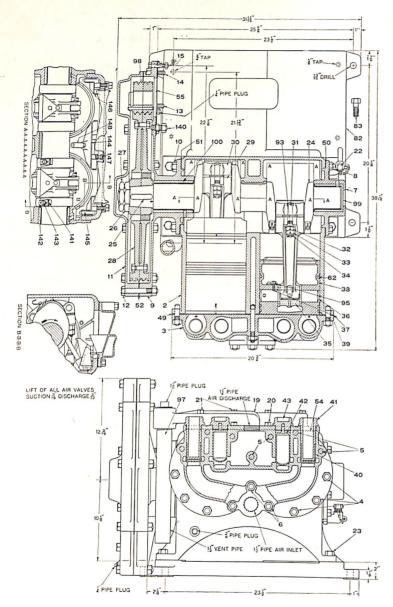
Outline and Sectional Views Type D-4-P Compressor
